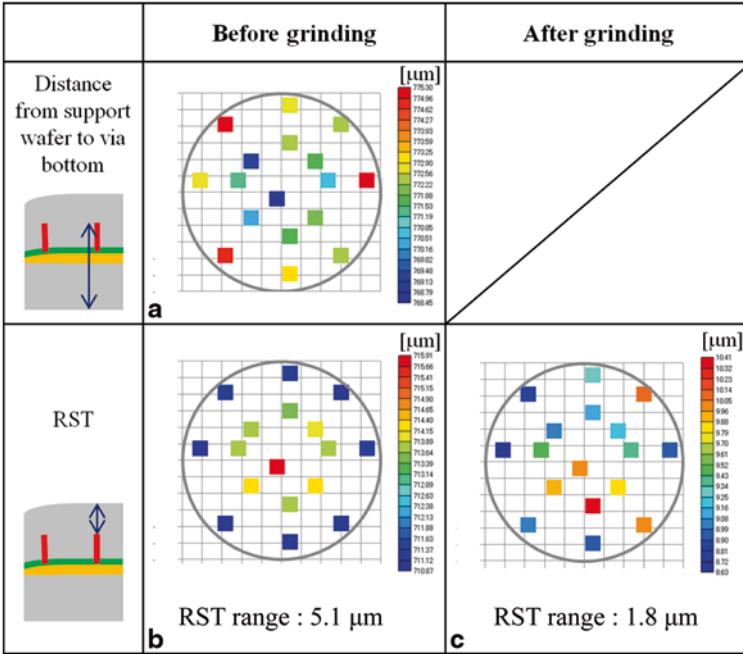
Examples of measurement with BGM300 before and after grinding. RST remaining silicon thickness
